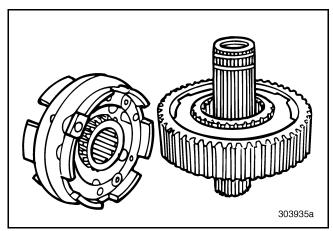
Synchronizer Assembly Removed (T313L/T318L Shown)
